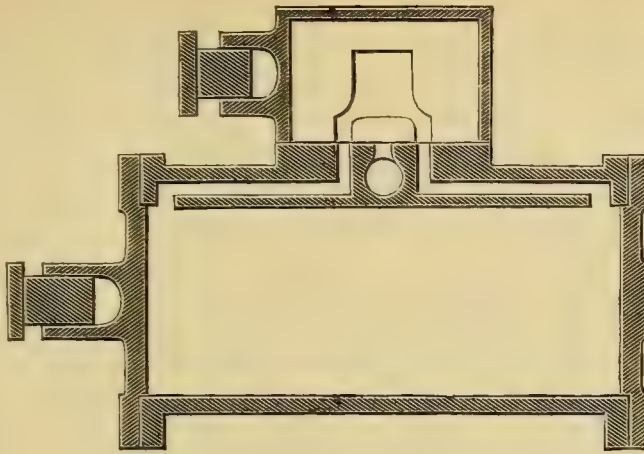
SECTIONAL VIEW OF VALVE IN POSITION.
